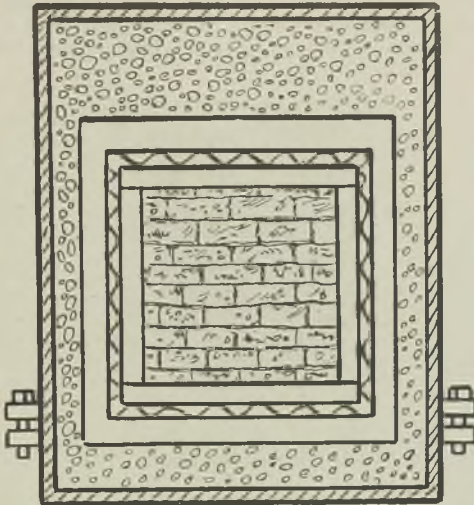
DIAGRAMMATIC SKETCH OF COKE HOPPER MOULD.
